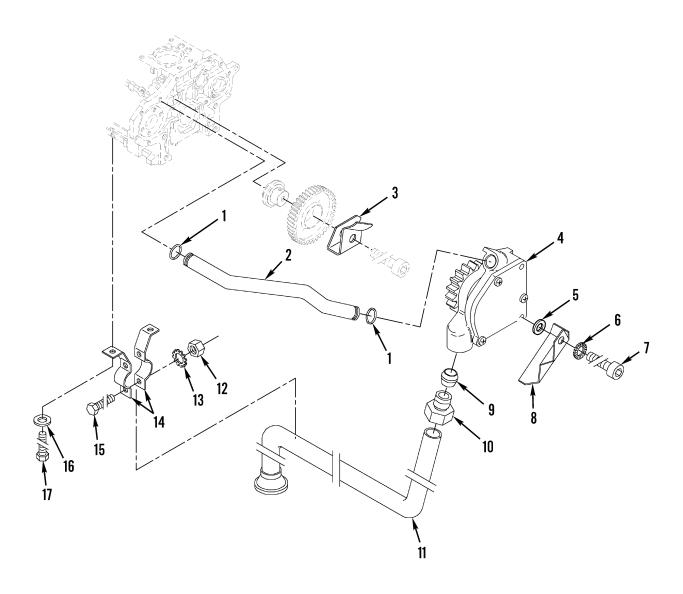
Oil Pump and Lines (Sheet 1 of 2)
